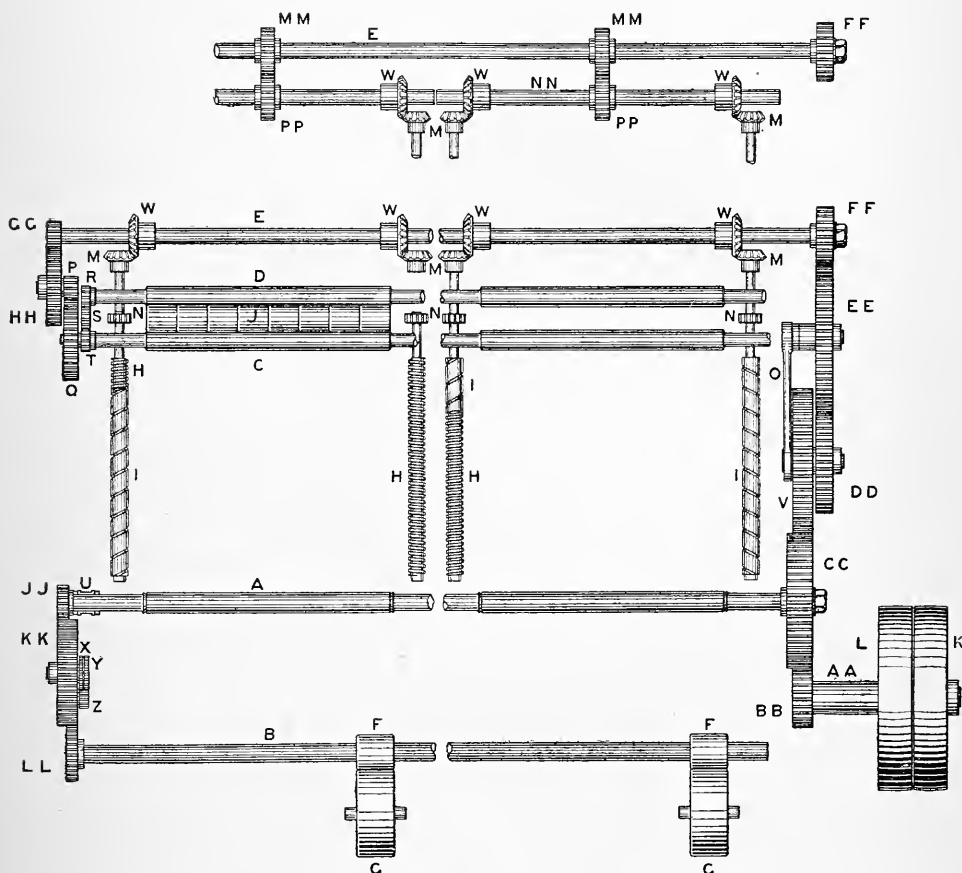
Diagram of gearing rollers and shafts for drawing frames, with single or double back shafts.
